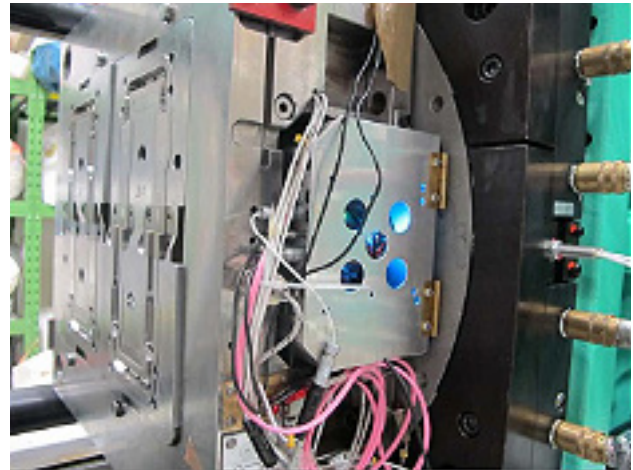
2K Tension Rod Tool with EDS Box [16]
